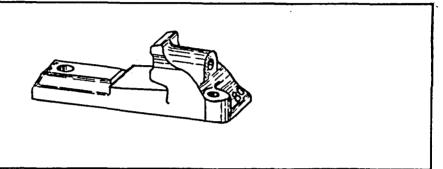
TYPICAL 60,80 & 100 B. COMMON TOE CHAIR X LAYOUT
